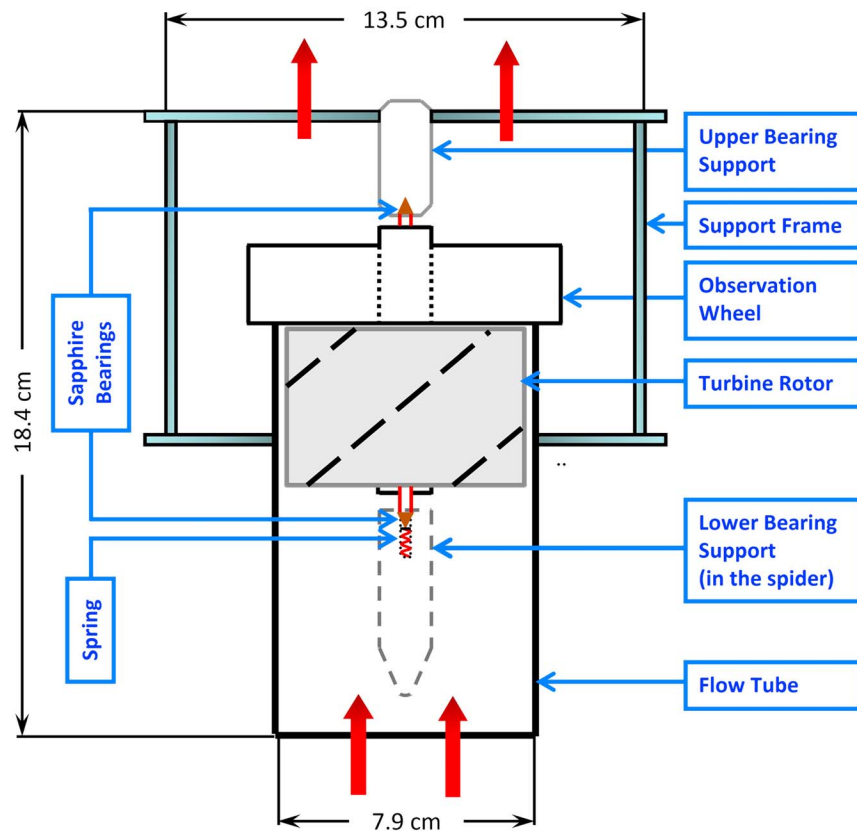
Schematic drawing (not to scale) of the turbine flowmeter showing the major design components. The internal diameter of the flow tube is 7.9 cm. The pipe adapter (Figure 5a) is not shown to simplify the drawing.
